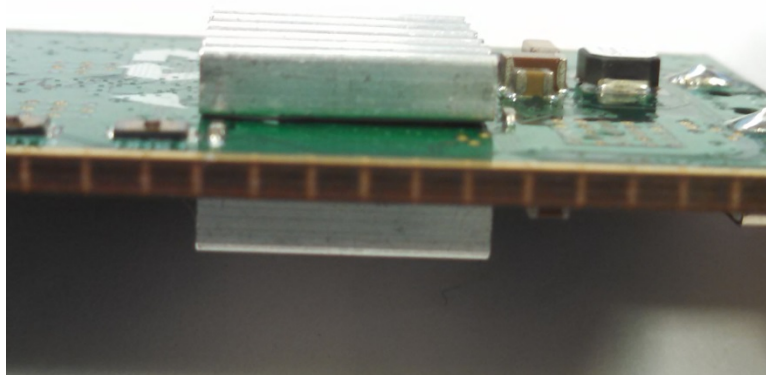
Heat Sink on Top and Bottom of SX1308 – Side View
